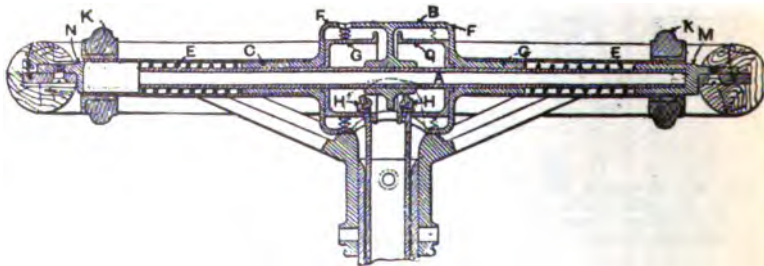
Steering Wheel and Attachments of the Panhard-Levassor Carriage. A, a shaft on a diameter of the wheel; B, a cylindrical fixed cap with toothed ends; C, C, a sleeve with toothed ends, F, F, in normal engagement with B, under tension of springs, E, E, being prevented from rotating; G, G, drums on which wire cables, H, H, are secured and wound; K, K, knurled handles, which may be grasped and pulled against the springs, allowing rotation of G, G. One cable, H, leads to carburetter link, the other to the spark adjuster.
